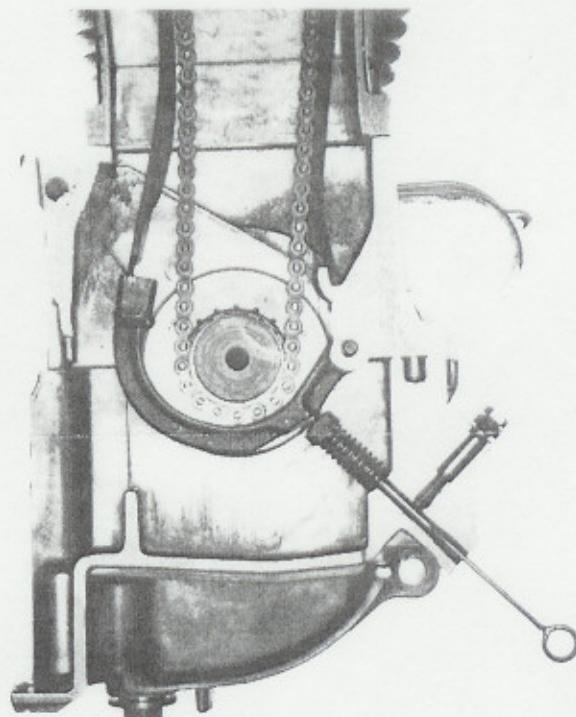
Position of tensioner components with upper tensioner holder removed and push bar released. Releasing the push bar causes the tensioner arm to raise the slipper.
